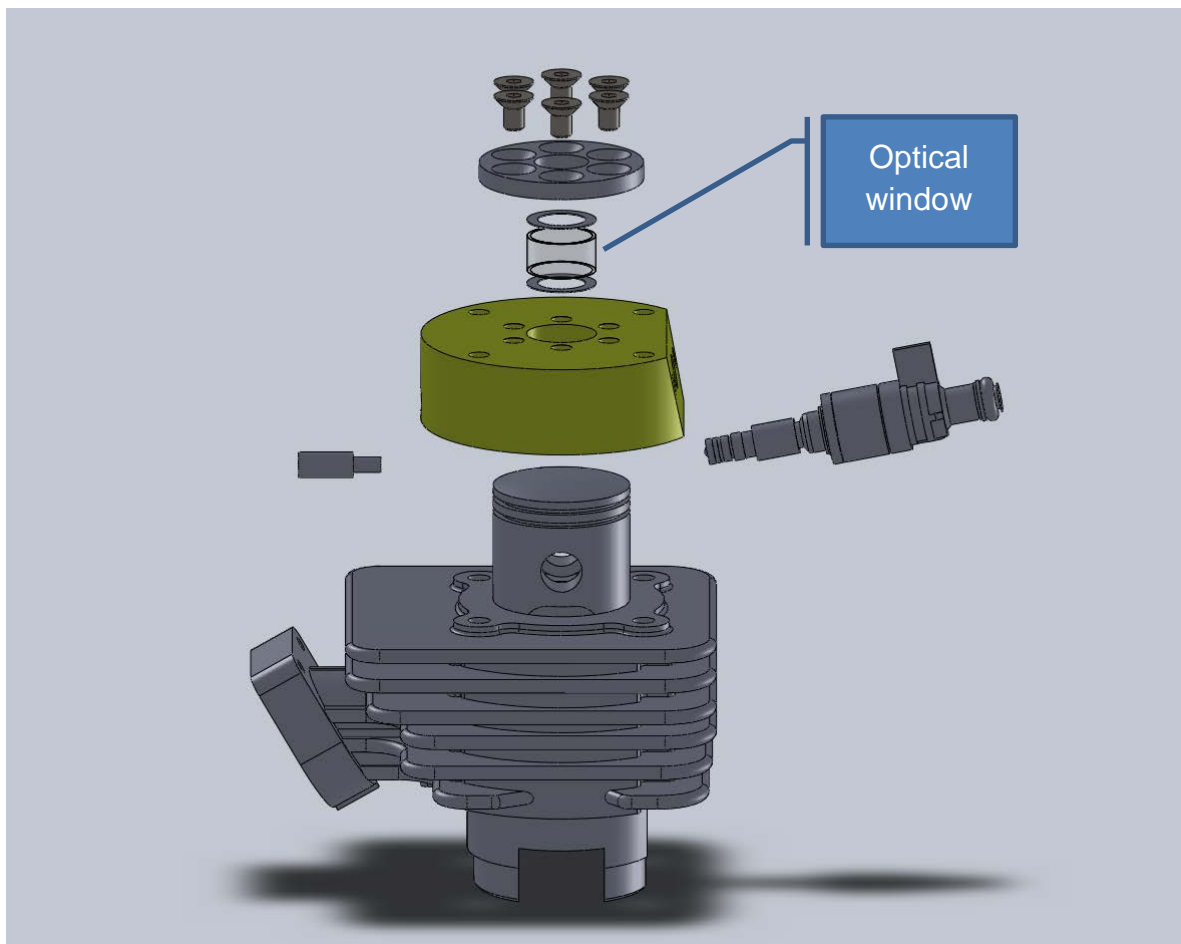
Exploded view of optical cylinder head (green) and surrounding parts
